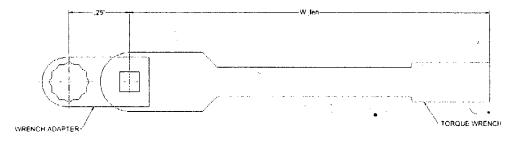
Wrench Adapter and Wrench Torque Arm Dimensions
